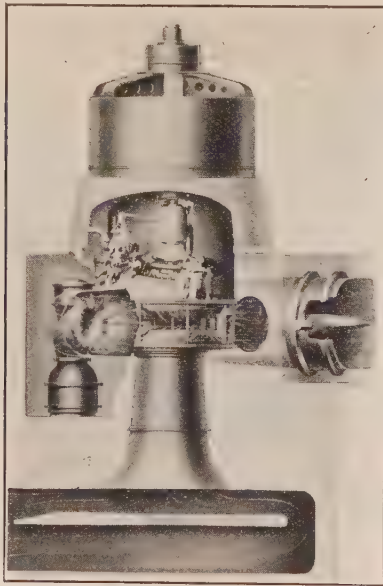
SECTIONAL VIEW OF HYDROELECTRIC UNIT, SHOWING BUTTERFLY VALVE, PRESSURE REGULATOR, HYDRAUCONE AND INTEGRAL TYPE GOVERNOR
